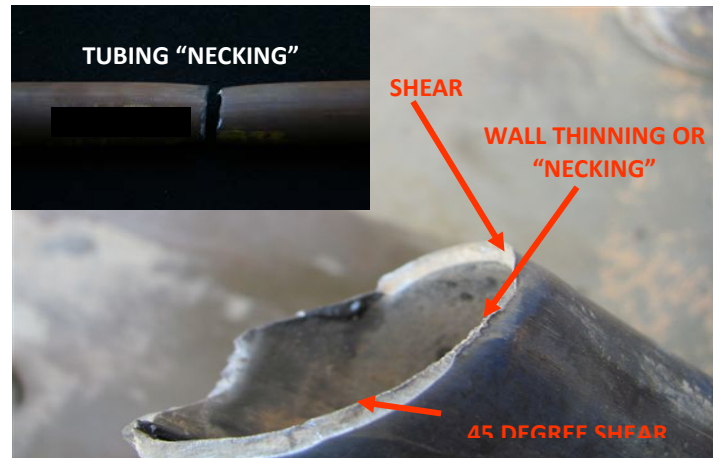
Ductile Tensile Fracture (Showing “Necking” and a 45° Shear Lip)
